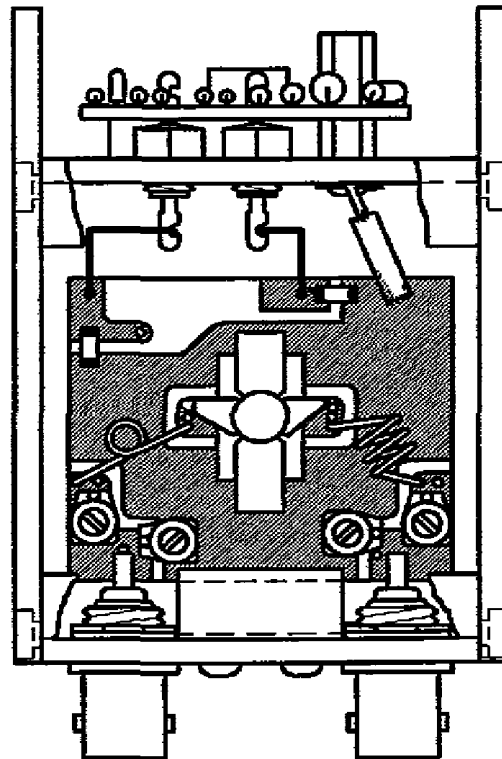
Mechanical layout of a typical amplifier assembly 3-7718 shown here.
